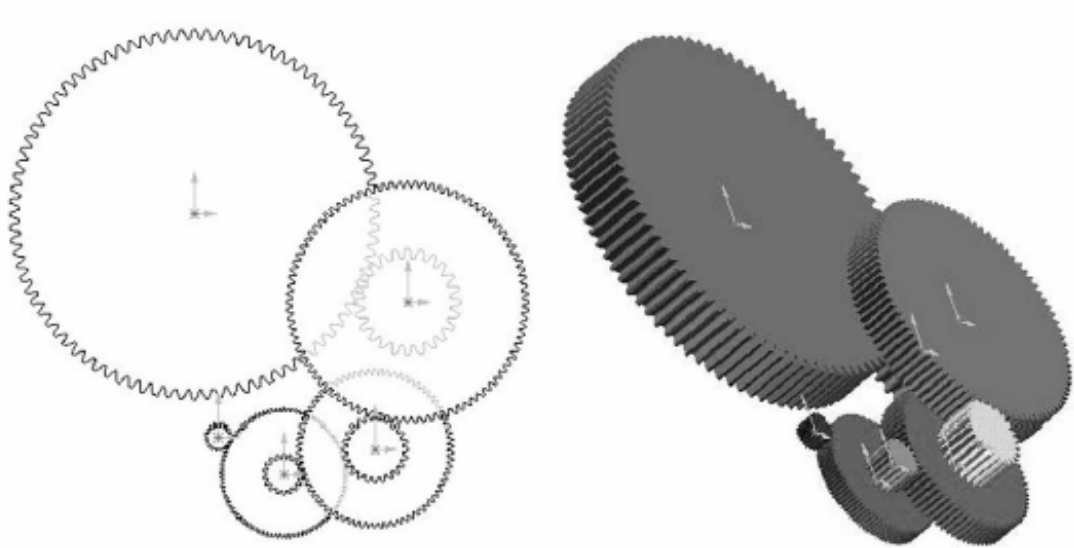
Configuration design of the gear drive, front and isometric view [32]
